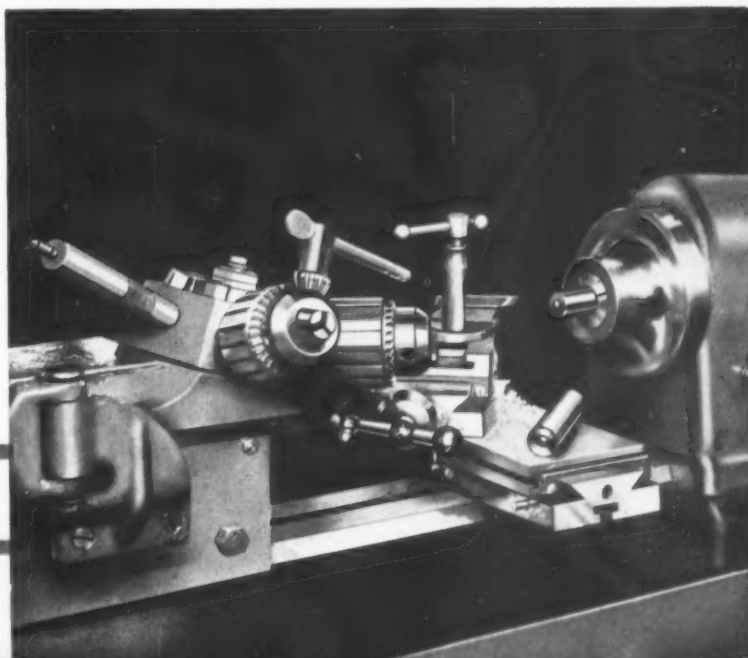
(Below) Precision Hand Screw Machine Employed for Drilling and Taking Angular Facing Cut on Dimpling Tools
